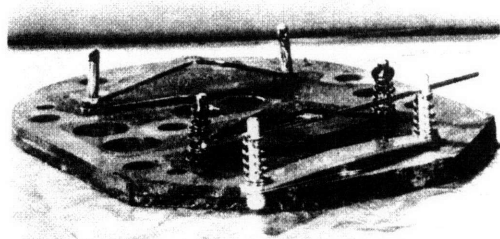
Picture of valve plate with damaged discharge valves, from [29, p. 26-25]. A healthy discharge valve is shown at the front of the valve plate.
